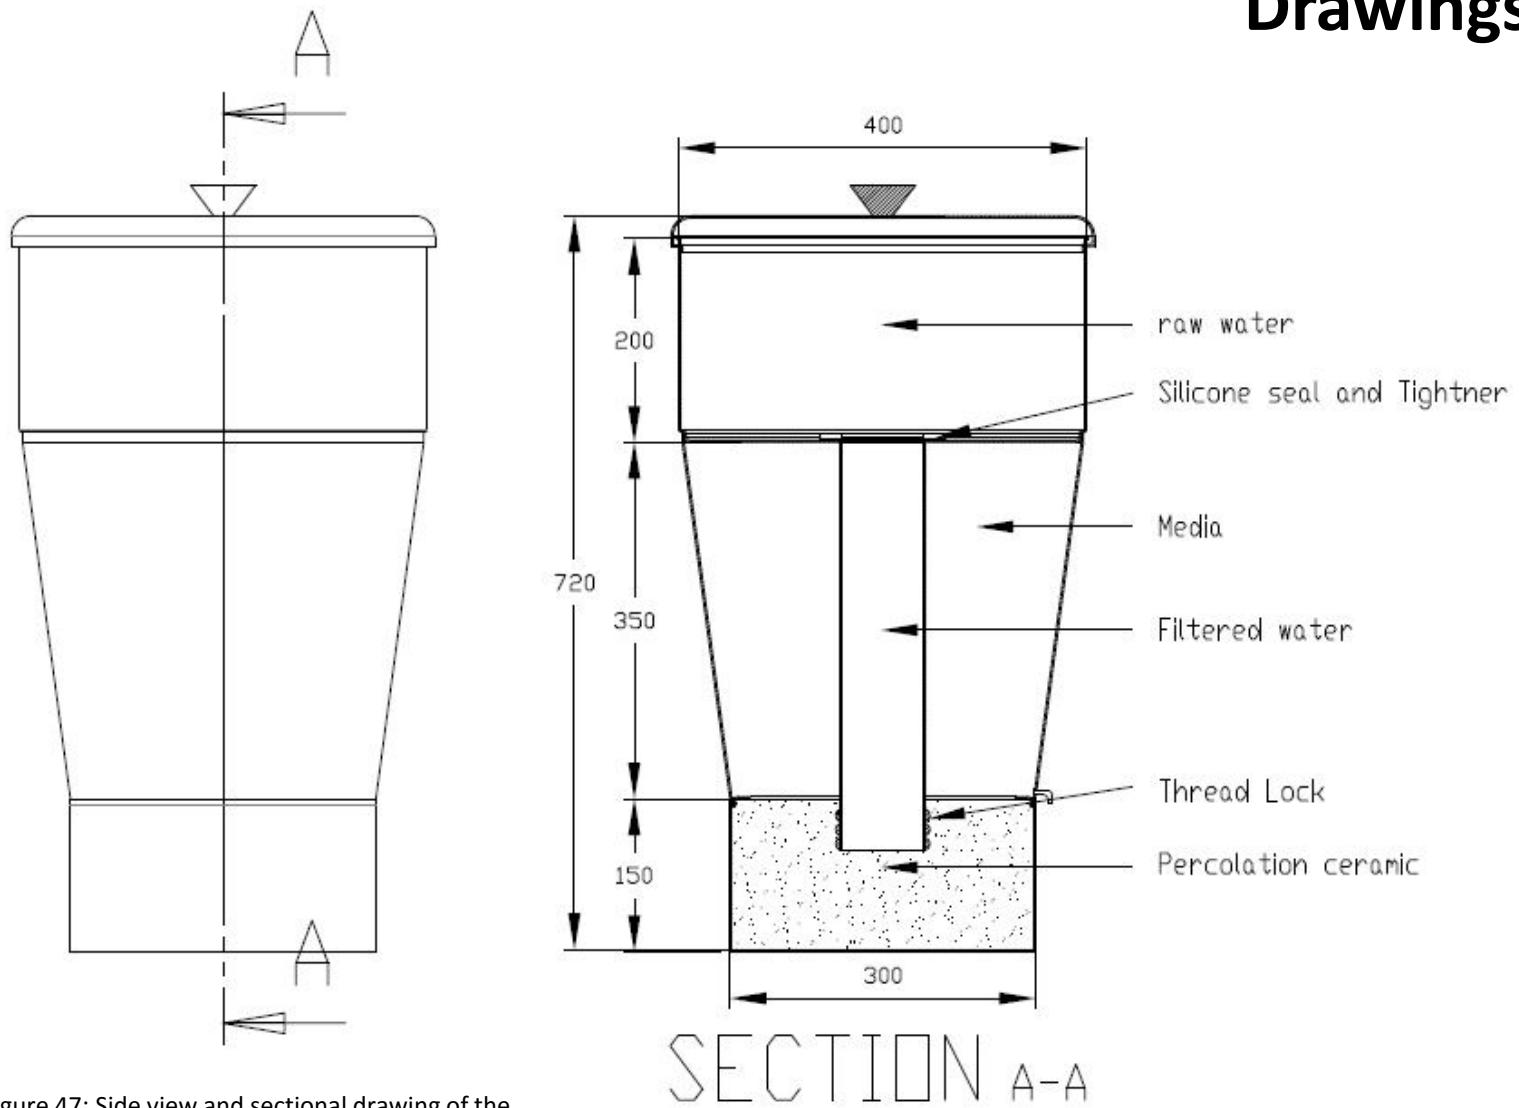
Side view and sectional drawing of the water filter. The dimensions shown here are for the small filter for family of 6
